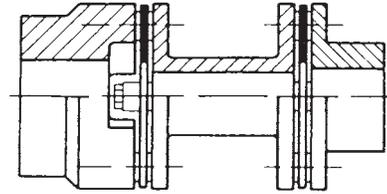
Double flexing with larger hub for larger shaft diameter.
